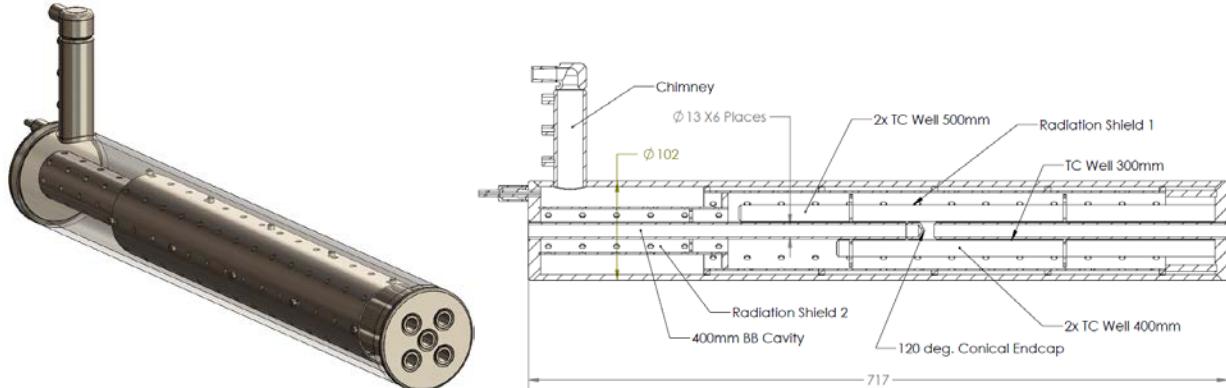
CAD model and drawing of the PCHP design for NPL system.
